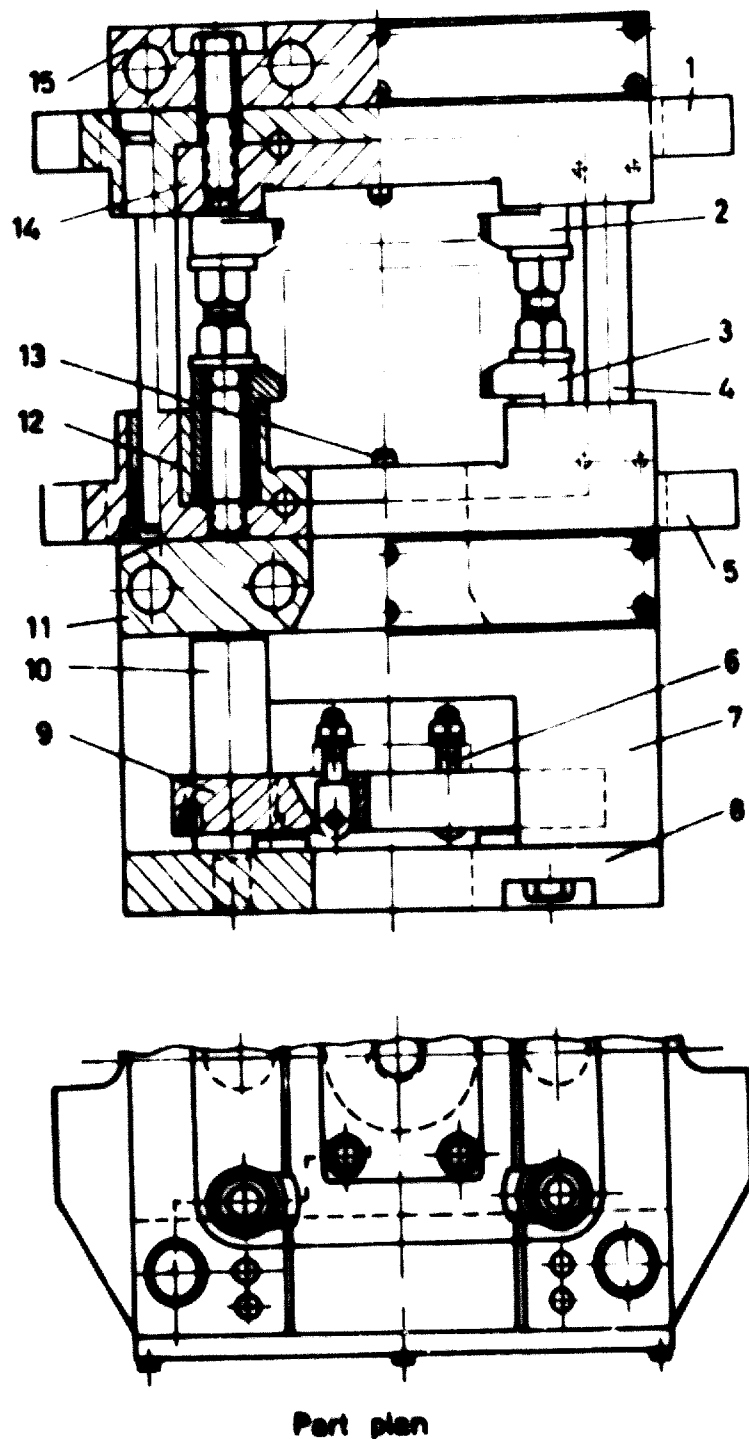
Group-adaptable unit for compression-moulding with exchangeable mould inserts
